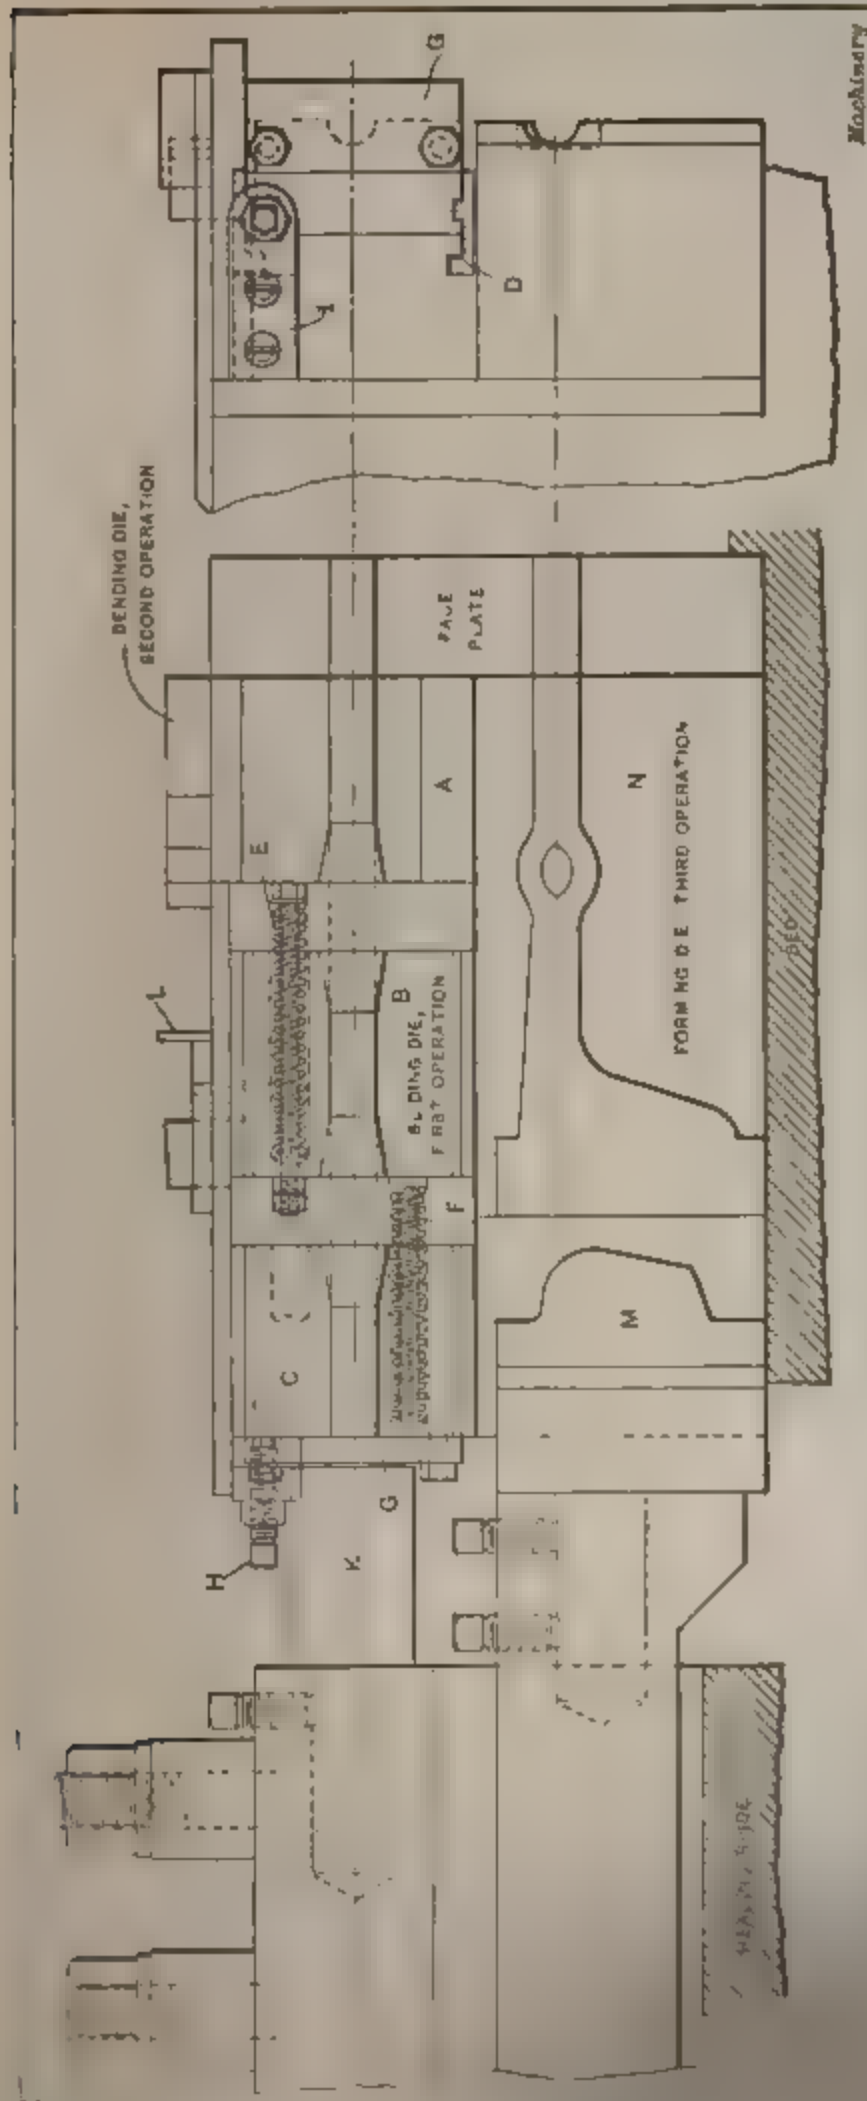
Construction of Dies and Tools used in the "National" Forging Machine for making Ford Front Axle
